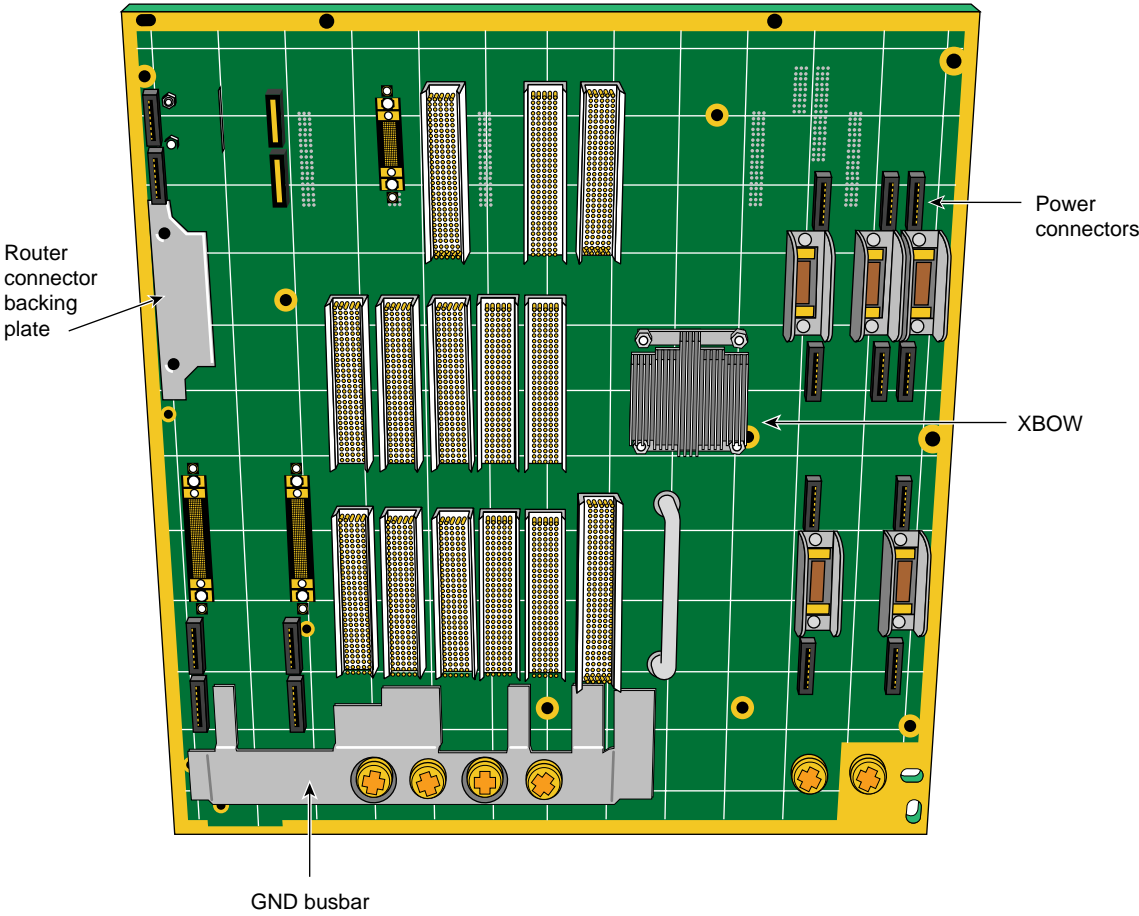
Onyx2 Deskside Midplane (Rear of Board)
